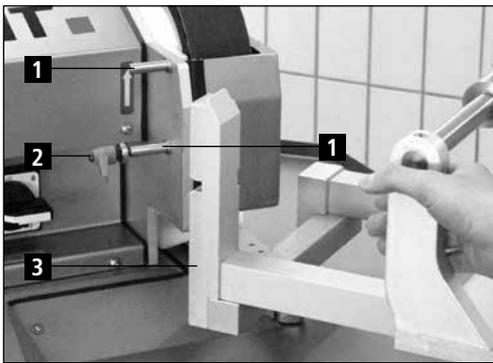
Swivelling the Universal Belt Grinding Unit to working position
